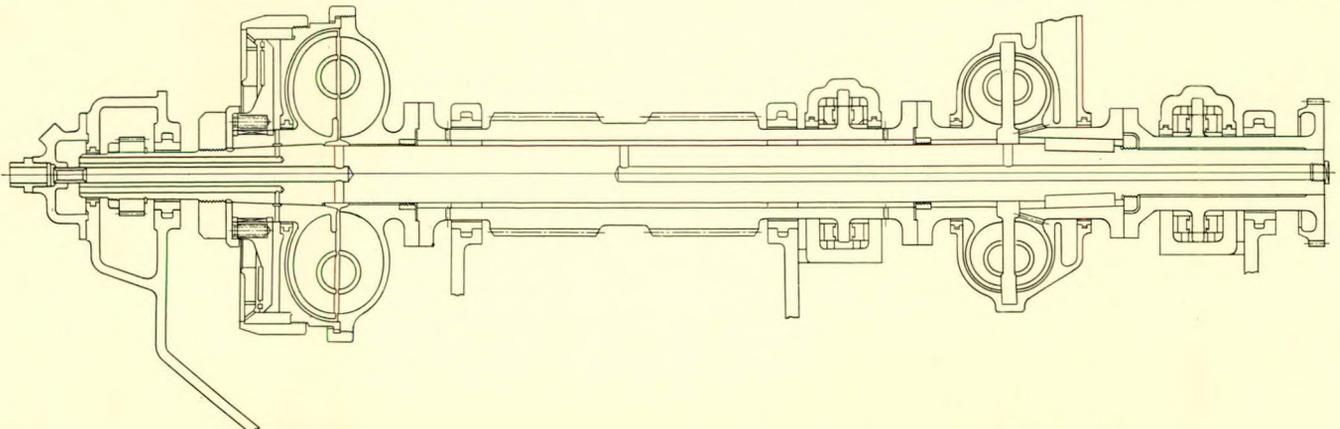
Hydraulic transmission system: section through primary pinion and quill shaft
